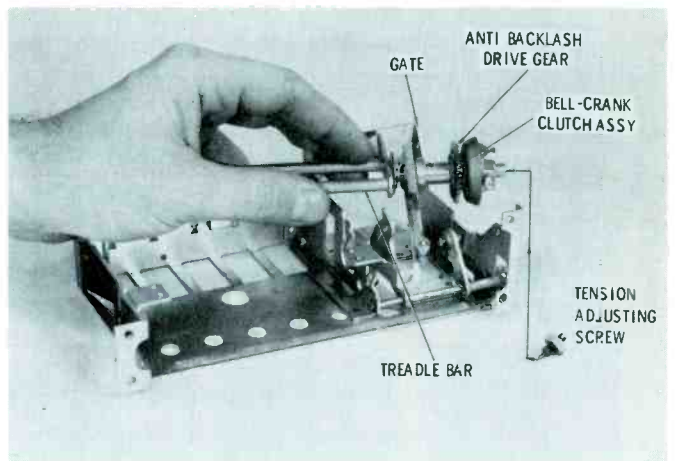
Disassembled tuner showing treadle bar and clutch.
